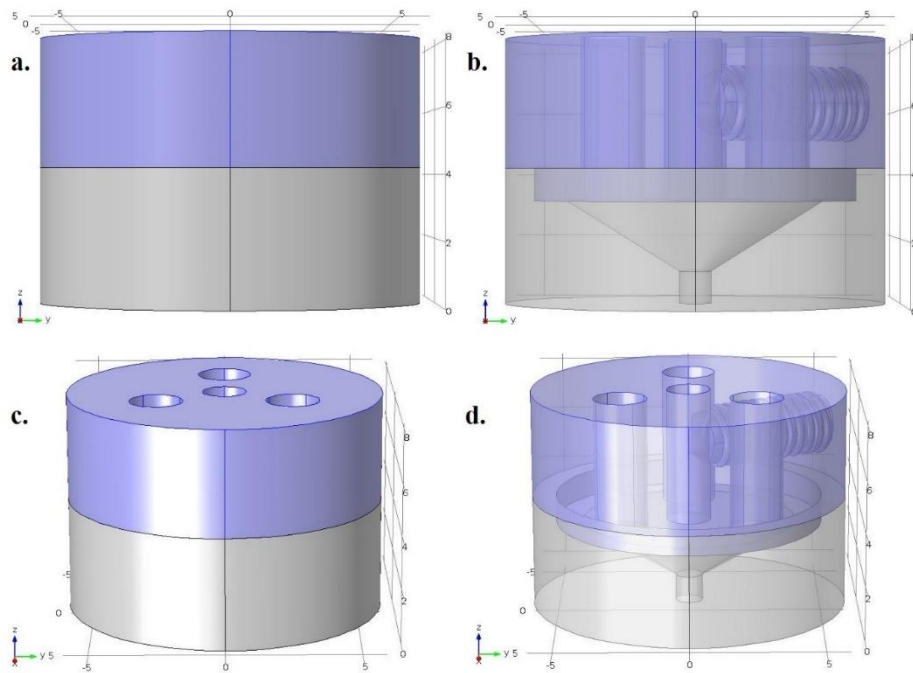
Schematic illustrations of front and inclined view of prototype 8 complete spinneret set, (a. front solid view, b. front transparent view, c. top inclined solid view, d. top inclined transparent view)
